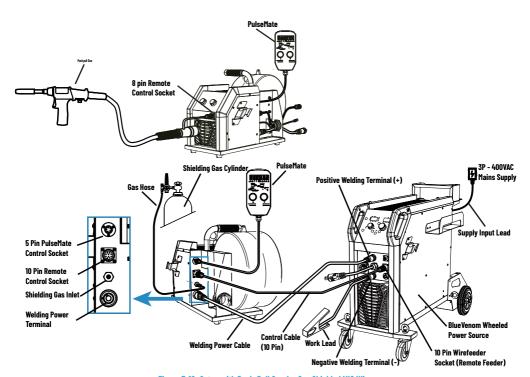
Setup with Push-Pull Gun for Gas Shielded MIG Wire
